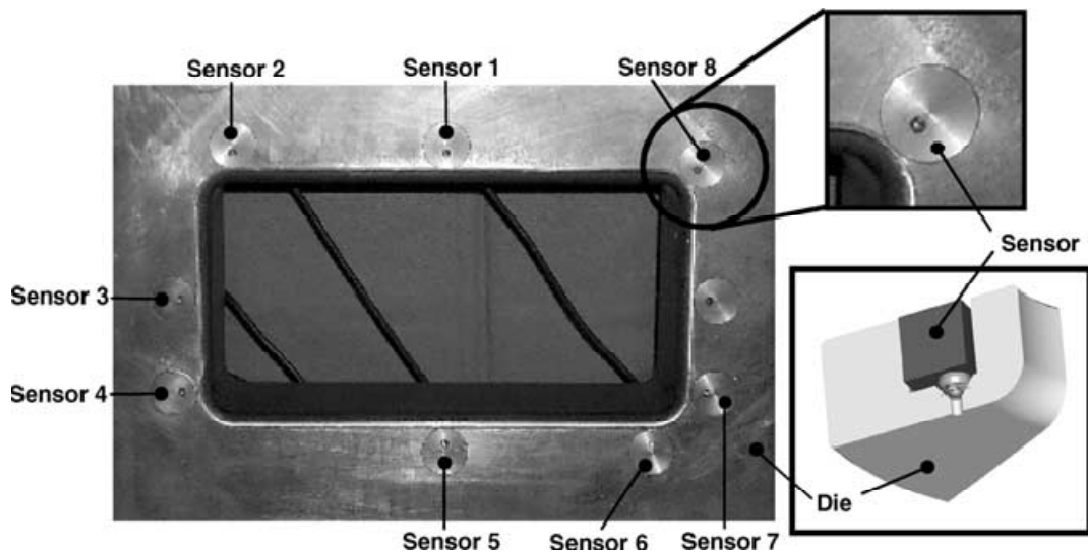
Utilization of the Optical Sensor in a Deep Drawing Tool
